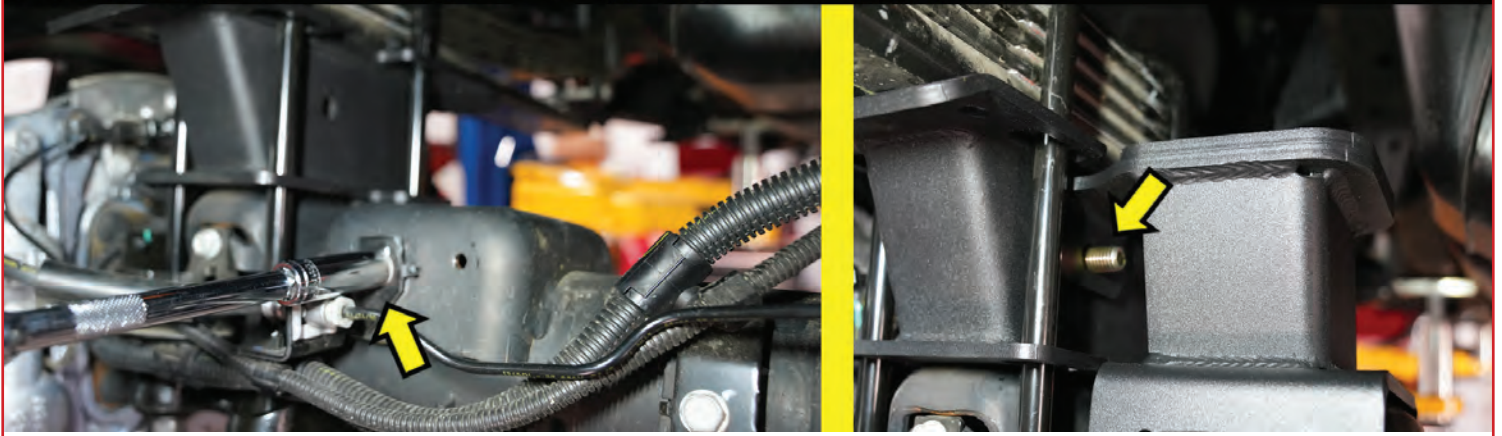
EMERGENCY BRAKE MOUNT AT REAR AXLE DIFFERENTIAL AND BUMP STOP EXTENSIONSIllustration 66
